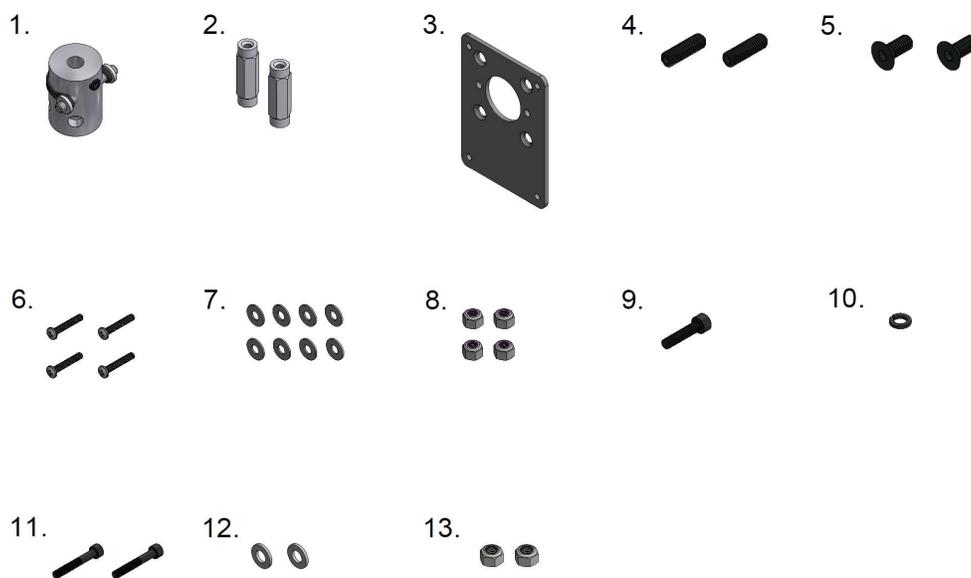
Pieces Supplied with the AGA93.5 Bracket Kit
